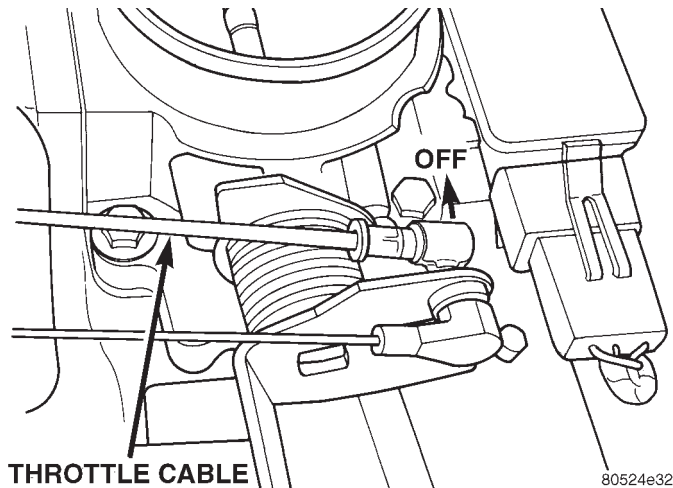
Throttle Cable at Throttle Body—4.0L Engine
